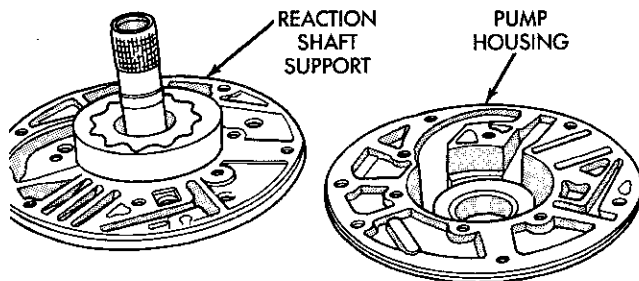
Separating Pump Housing From Reaction Shaft Support
